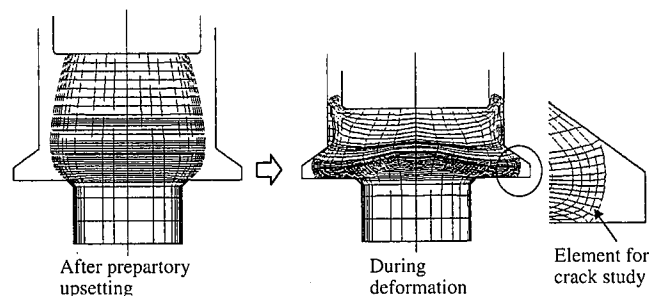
Element positions for studying flange bolt forming and cracking
